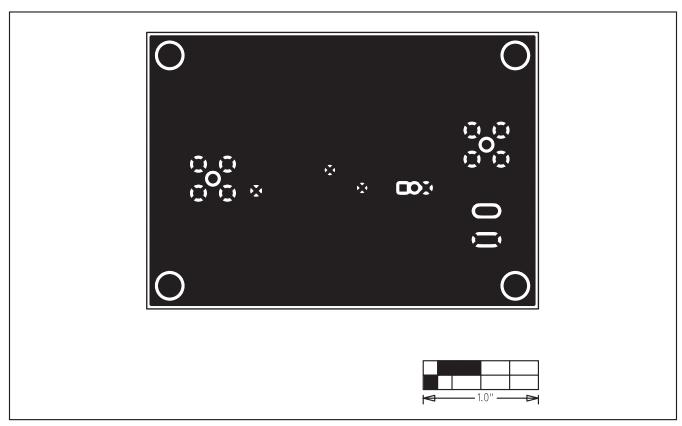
MAX4090 EV Kit PCB Layout—Solder Side
